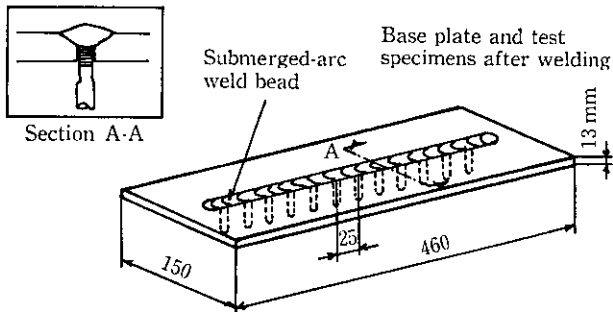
Welding procedure of reheat cracking test (Implant test, AMAX<sup>13</sup>)
